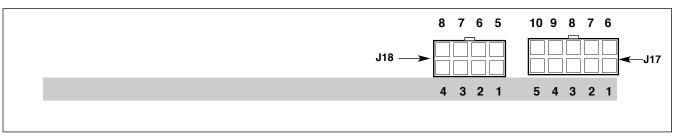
FEED-THRU PC BOARD PLUG DETAILS -PLUGS J17 AND J18
